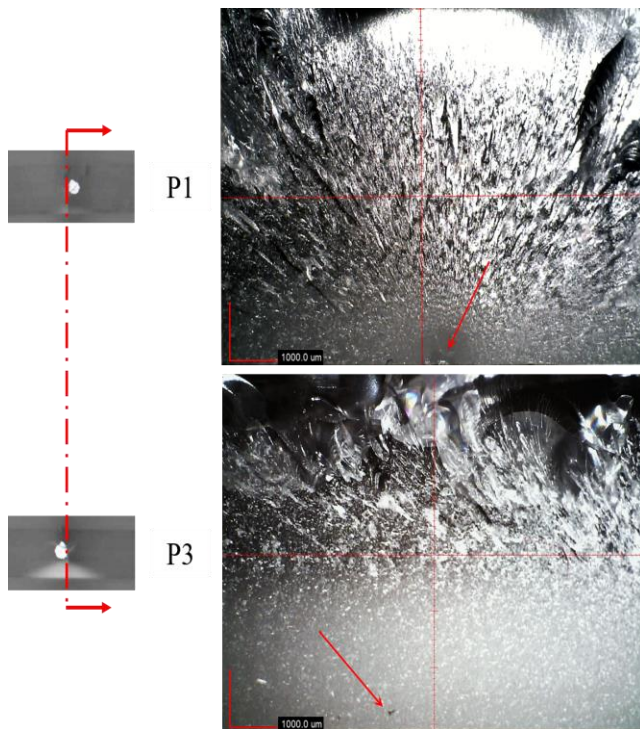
Zoomed in images for fractured surfaces of specimens P1 and P3.
